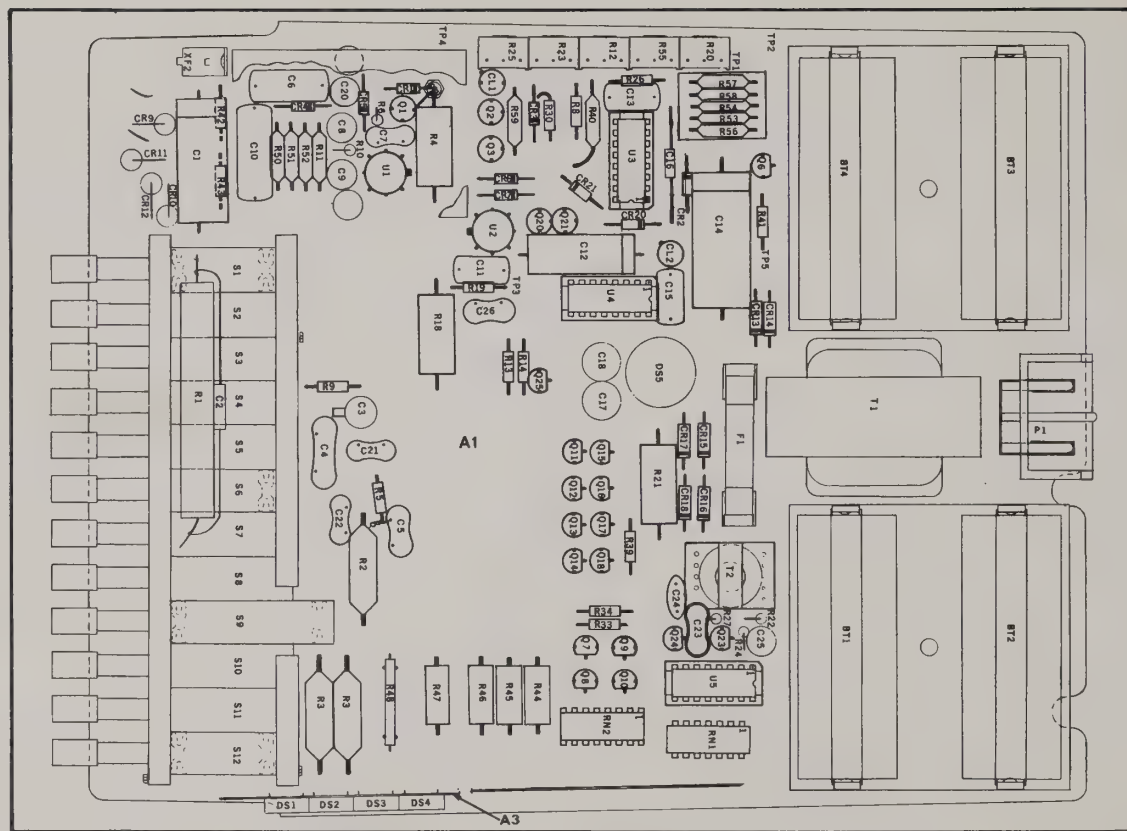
8000A-01 MAIN PCB ASSEMBLY
